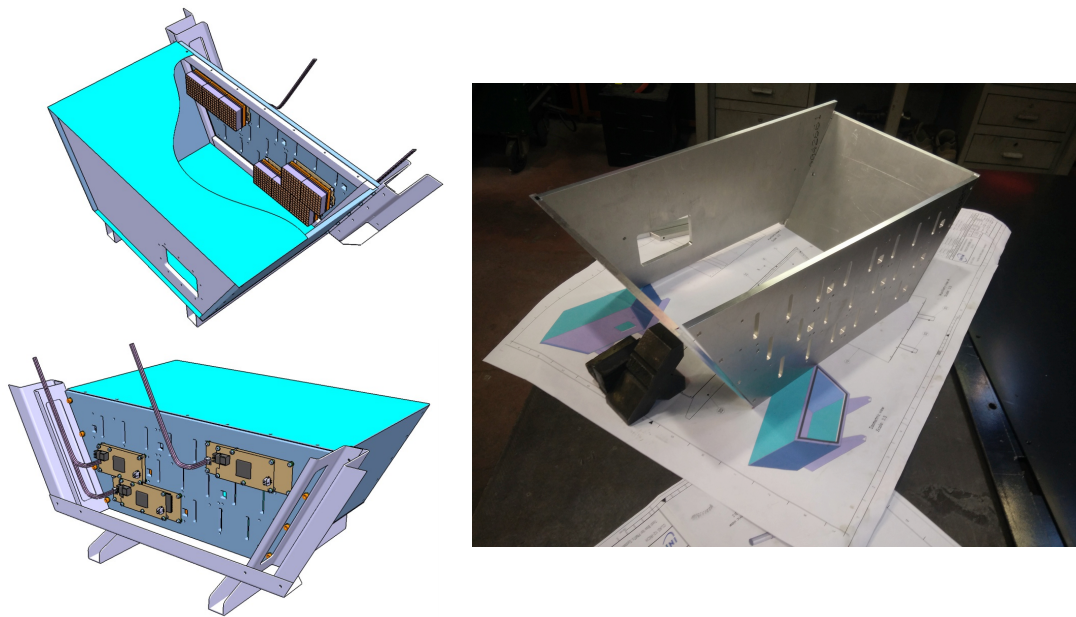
Design and assembling of a real-scale section of the electronic panel.
